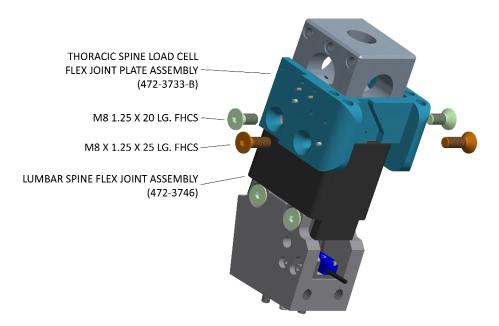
Attach Adaptor Plate Assembly to Lumbar Spine Flex Joint Assembly
